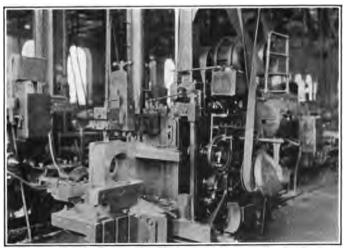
Draw-cut shaper in operation on edges of brasses.
